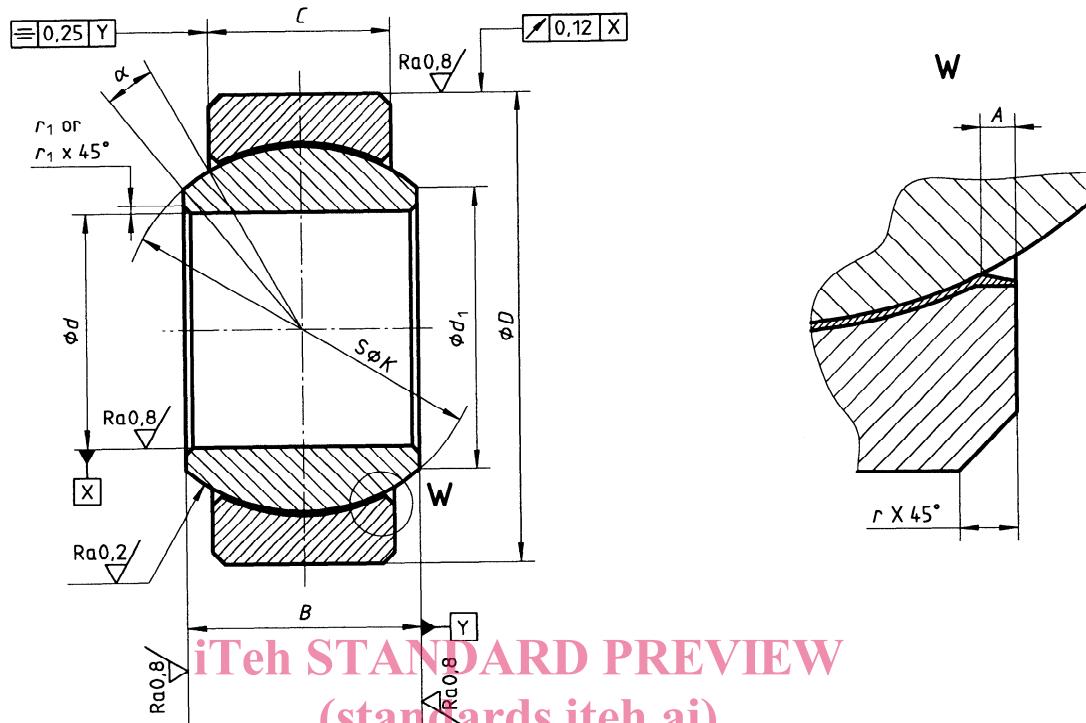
Spherical plain bearing with self-lubricating liner without face groove
